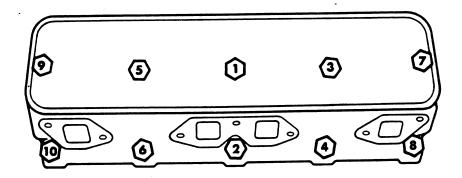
CYLINDER HEAD BOLT TIGHTENING SEQUENCE
